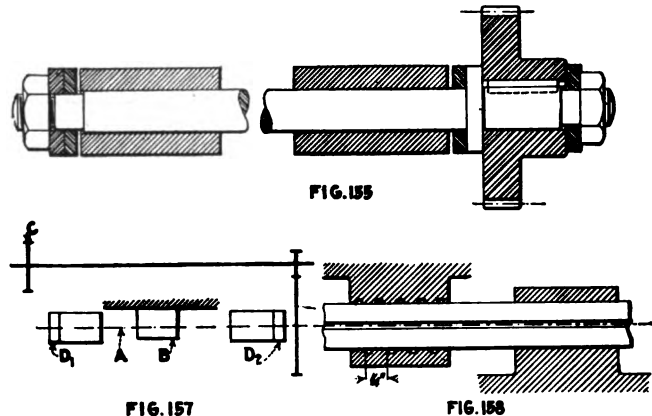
PLATE PLANNER LEAD SCREW WITH TWO THRUST BEARINGS. FIG. 157—FEED SCREW DRIVEN THROUGH SEPARATE SHAFT. FIG. 158—LEAD SCREW USED AS FEED ROD
